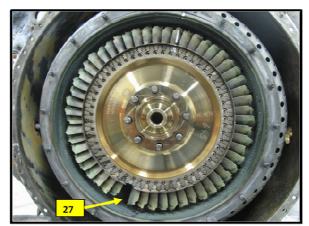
Left engine GGT disk with the position 27 blade fractured.
